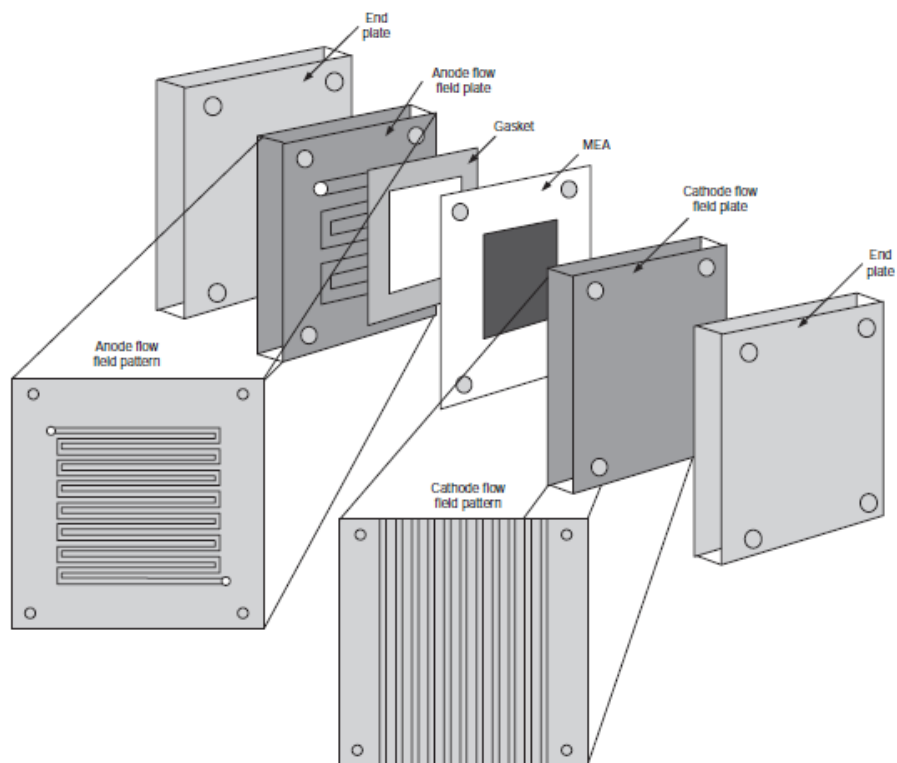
An exploded view of a fuel cell stack ⁵⁴
